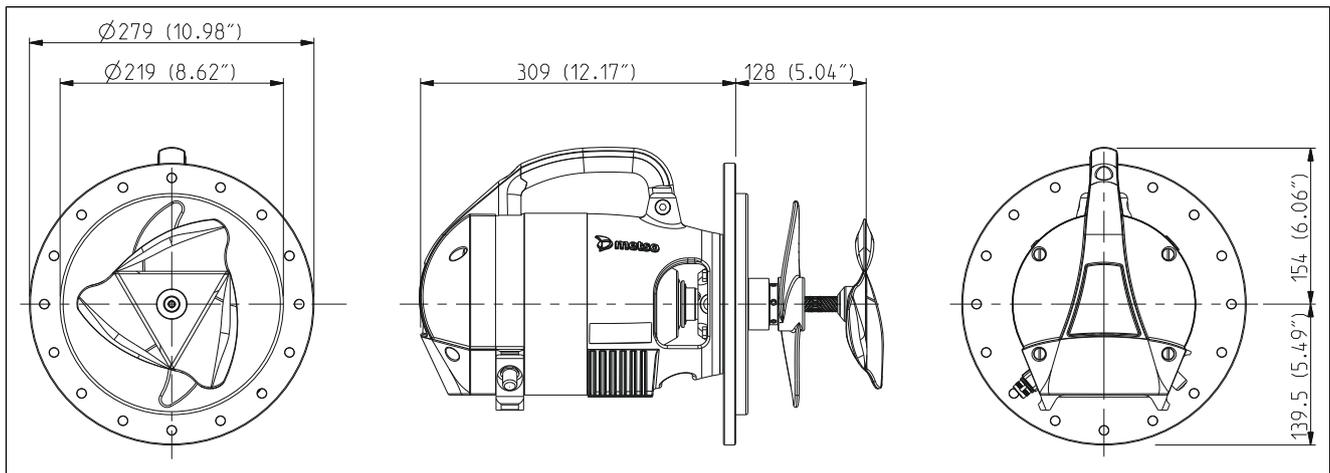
The dimensions of the transmitter with TM sensing element and large flange, MD model.
